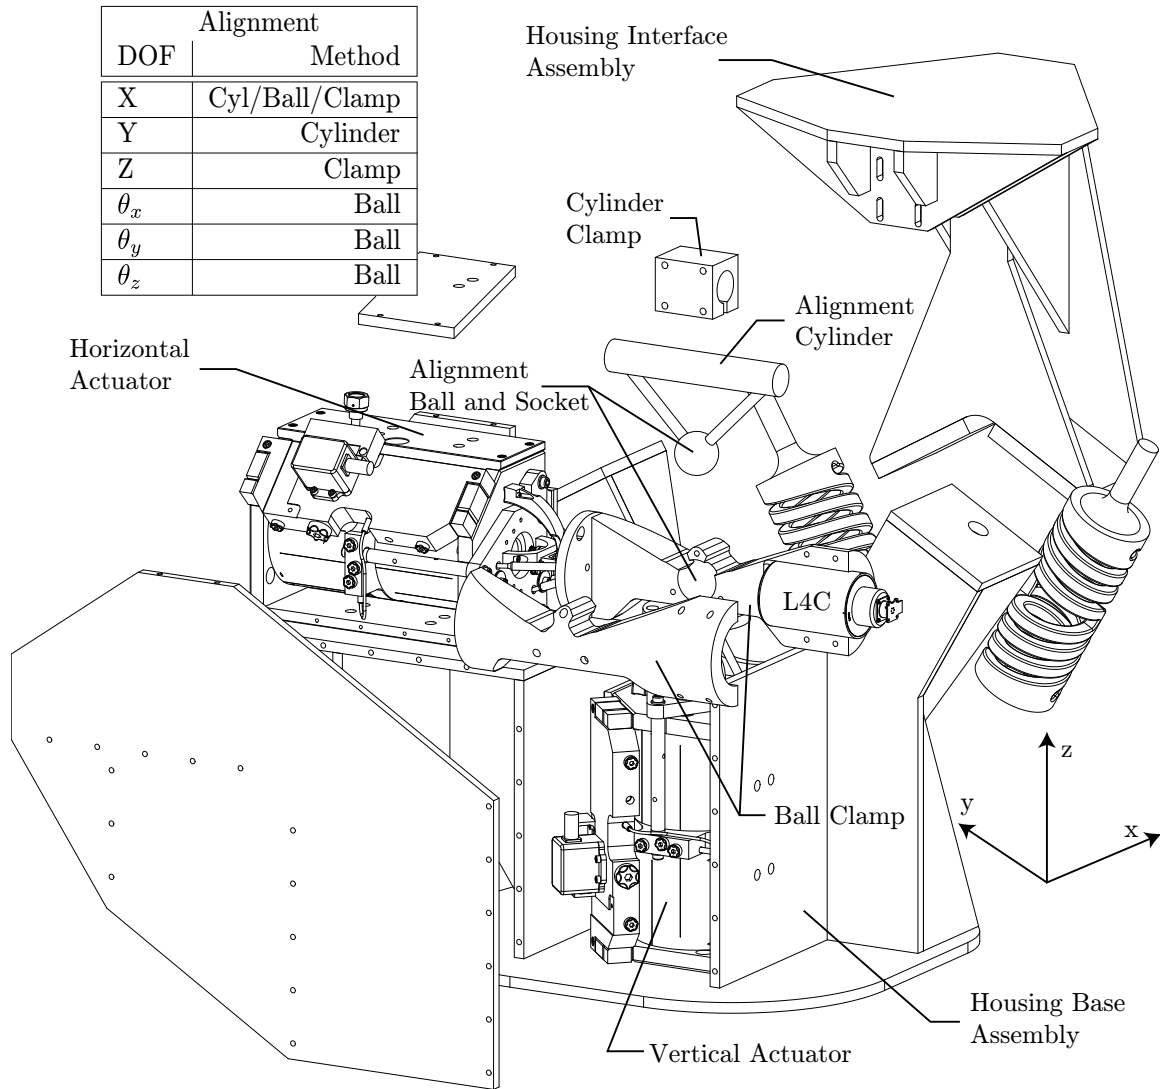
An exploded view of the proposed actuator housing design. The adjustment in Z is given by moving the cylinder clamp in the slotted holes on the Housing Interface Assembly.
